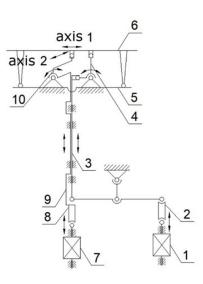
Conceptual schematic of the developed active balancing mechanism for the rotating centrifuge assembly; 1 – axial shift motor, 2 – motor 1 control module, 3 – linkage of lever 4, 4 – axial shift lever 1, 5 – fixed plate, 6 – balanced plate, 7 – axial shift motor 2, 8 – motor 2 control module, 9 – linkage of lever 10, 10 – axial shift lever 2.
